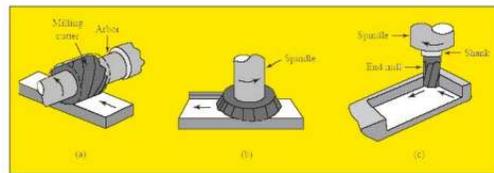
The three basic milling operations: (a) milling, (b) face milling, (c) end milling
